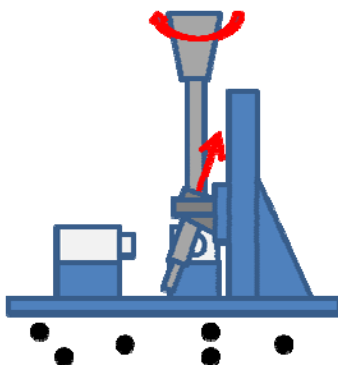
Inner race of bearing was no longer supported by structure of bearing
